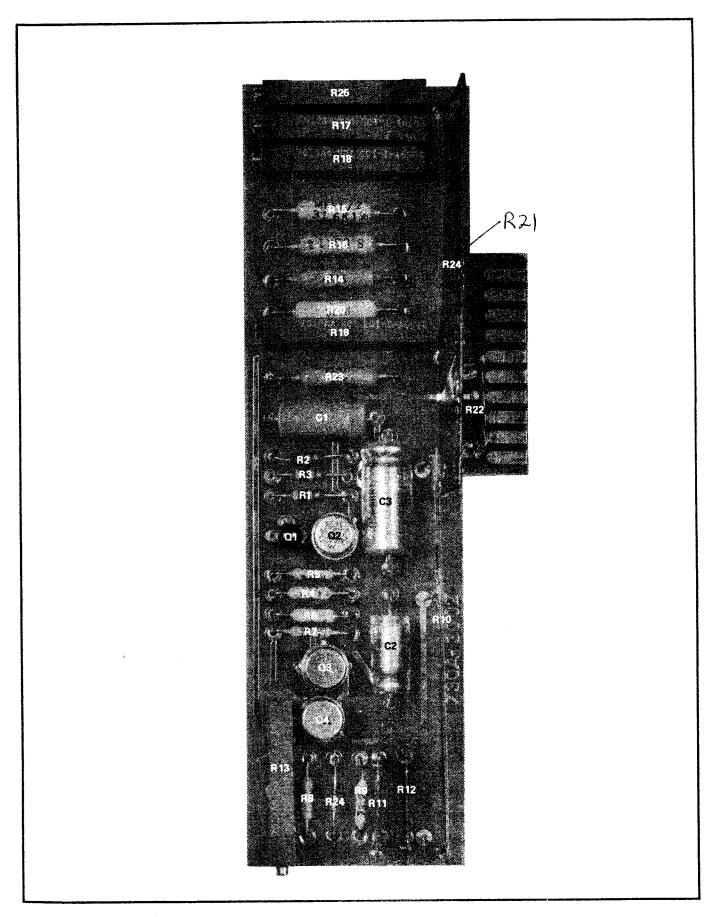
REFERENCE SUPPLY ASSEMBLY
